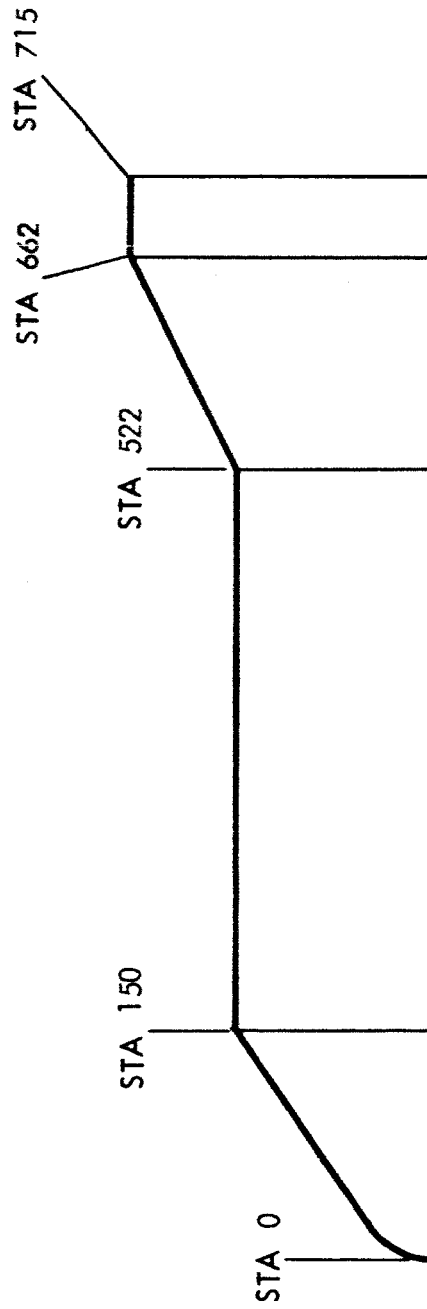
Basic Dimensions of Mars Braking Vehicle
